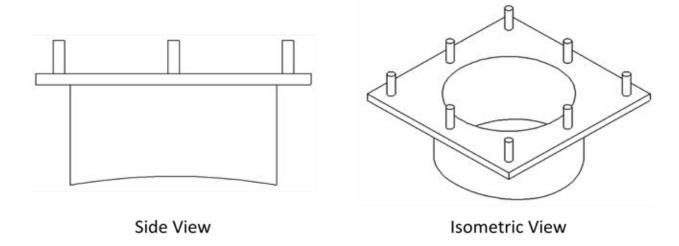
The mounting bracket used to mount the probes to the exhaust duct.
